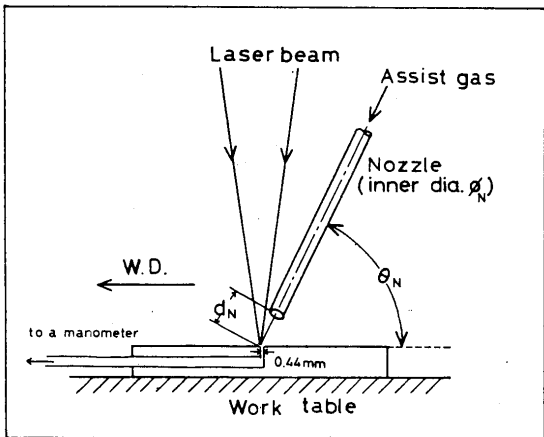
Assist gas nozzle for high power CO₂ laser welding.
